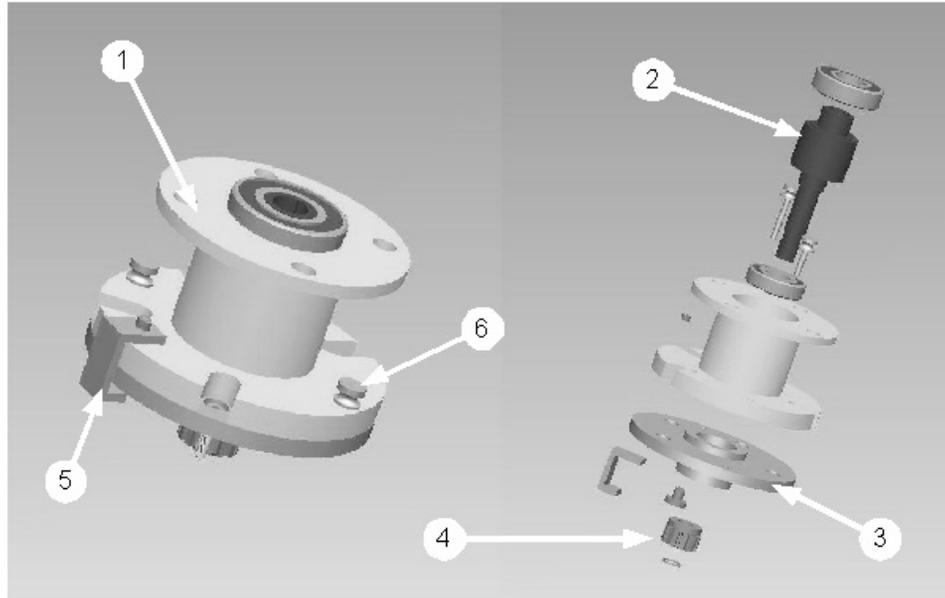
Adaptor Cup Assembly components of interest: 1) Bearing Cup, 2) Power Shaft, 3) Adaptor Plate, 4) cutter pinion, 5) HT-Bracket, 6) HT-thumb screw (X2)
